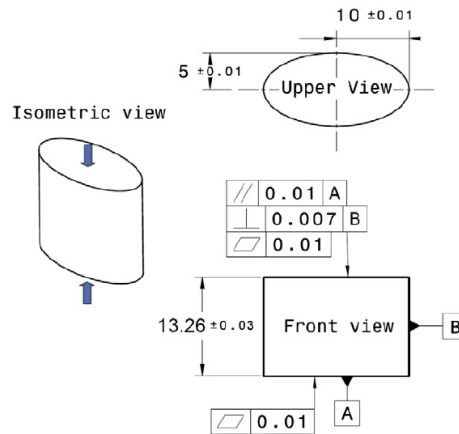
Geometry and dimensions(in mm) of the compression test specimens [34].
